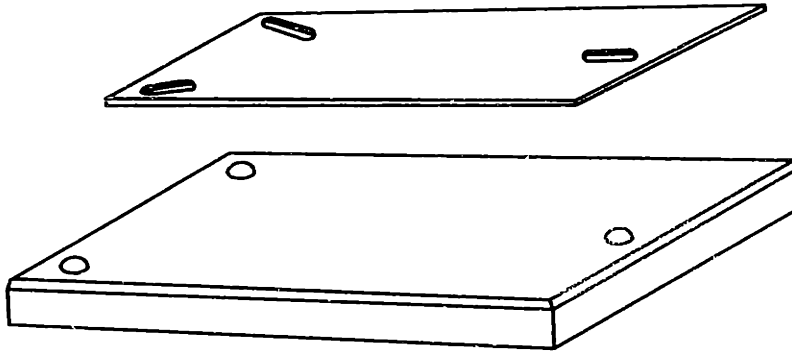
Six point coupling used for fixturing fabricated boards to the test fixture.
